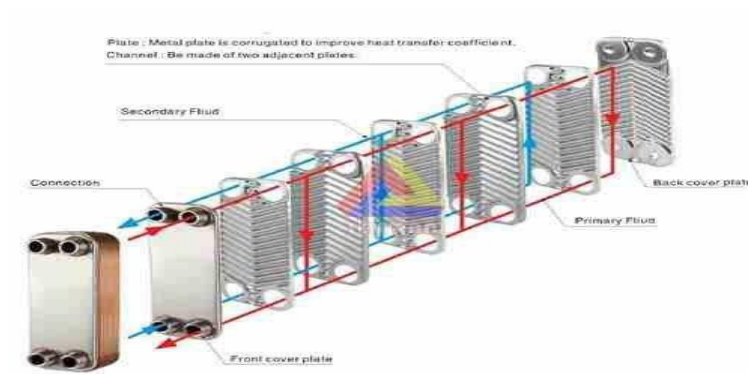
Ss - Cu plate assembly through heat ex changer
